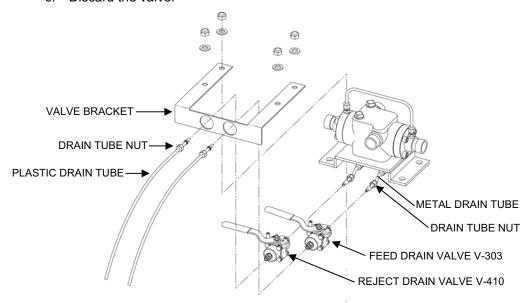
Turbocharger Feed or Reject Drain Valve V-303 / V-410 Replacement.
